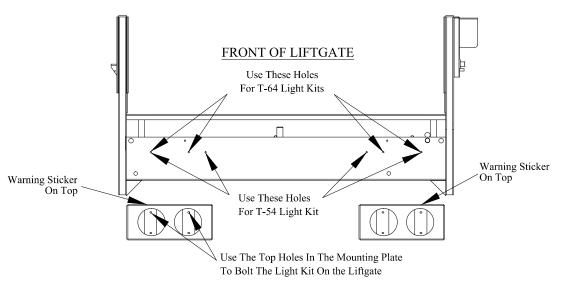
Light kit mounting holes. 2-light kit is shown, 3-light kit is similar.
